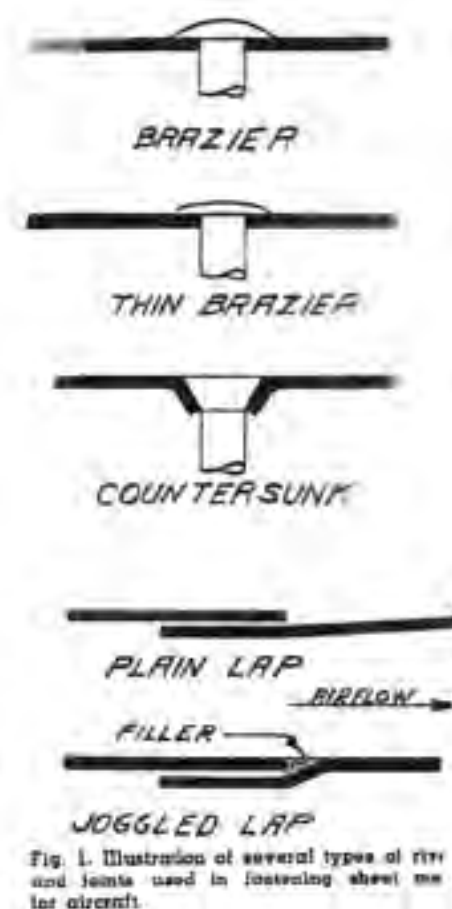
Illustration of several types of rivet and joints used in fastening sheet metal aircraft.
